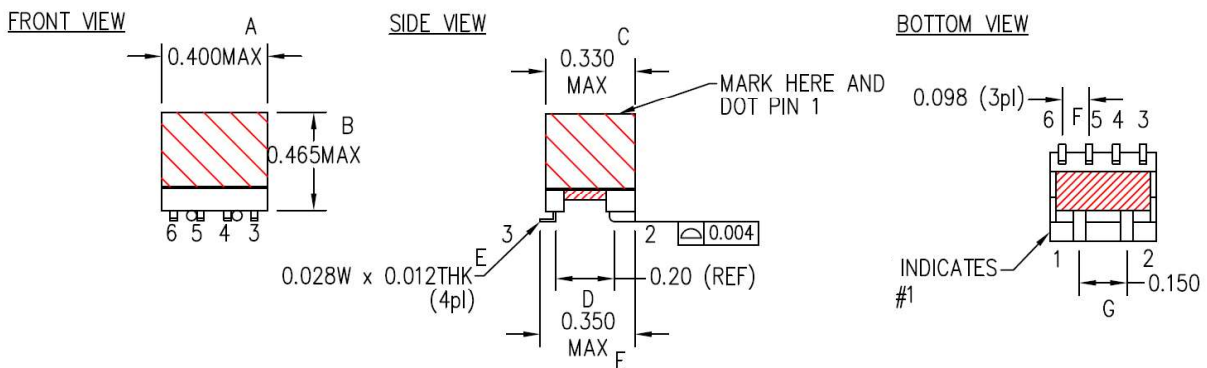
Renco RL-10950 Mechanical Drawing (dimensions in inches)
